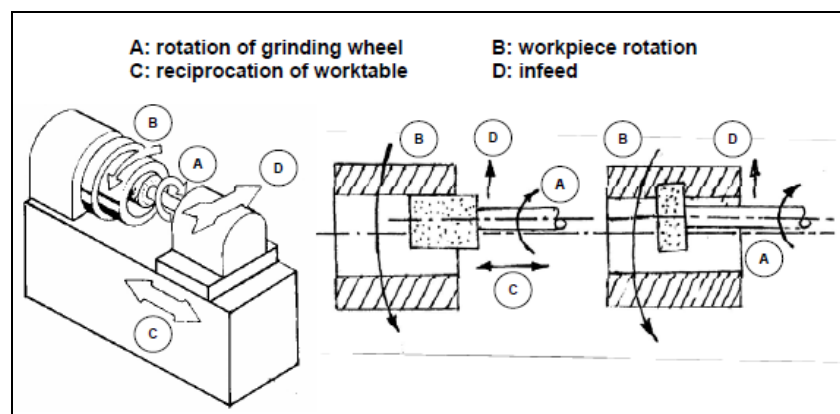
(a) Internal Center less grinder (b) Internal (transverse grinding and plunge grinding)
